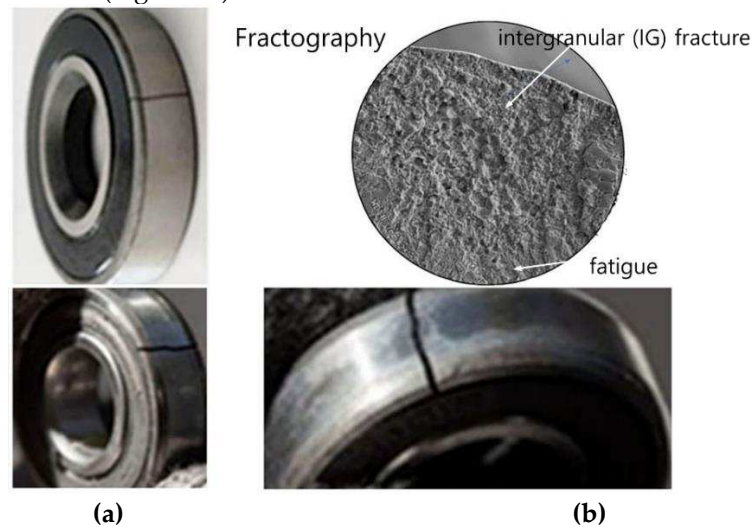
Failed bearing in auger motor from the marketplace and in the 1st ALT; (a) Unsuccessful part from the marketplace, (b) Failed bearing with in 1st ALT – crack origin at outer ring
